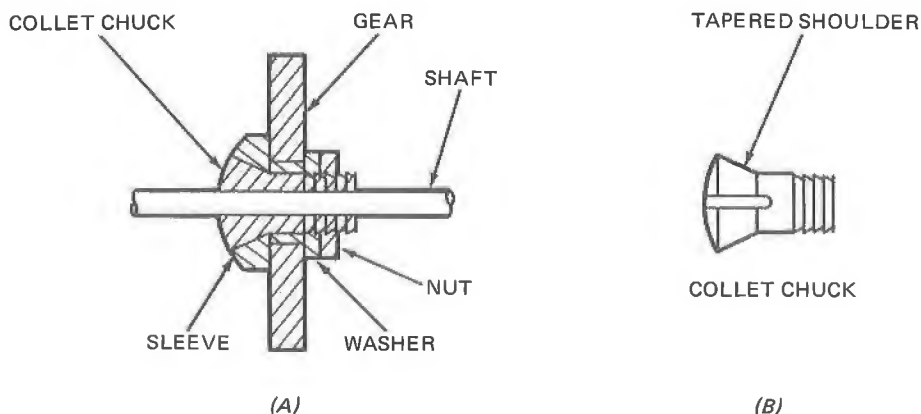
Mounting Hubless Gears with a Collet Chuck
